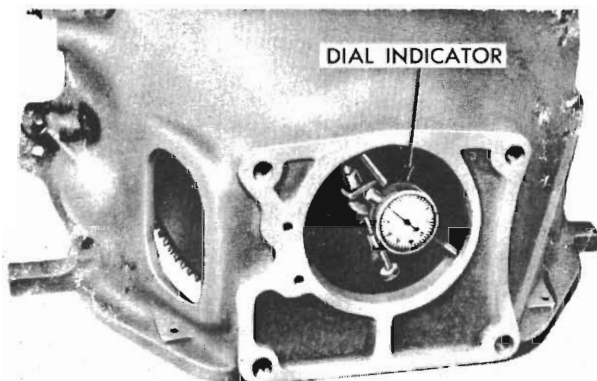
Checking clutch housing bore (Tool E6C10)
